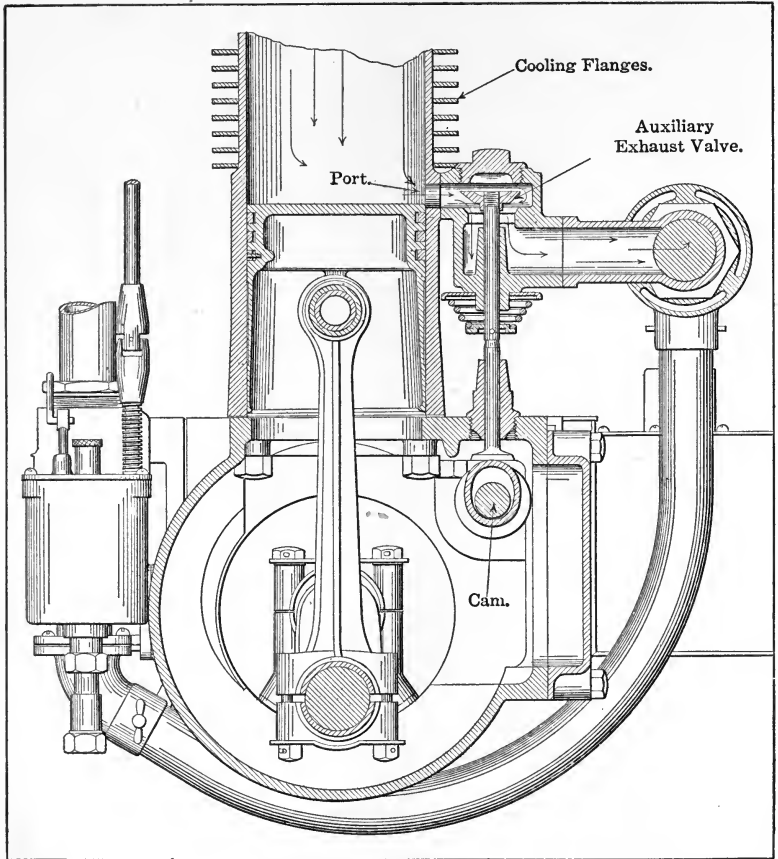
Depicting Section Through Power Section of One Type of Franklin Engine, Showing Application of Auxiliary Exhaust Valve to Relieve Cylinder of Flaming Gases at End of Power Stroke.
